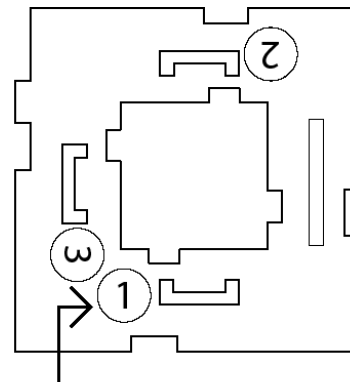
PWTB Pressure Sensor Assembly (no cable)
